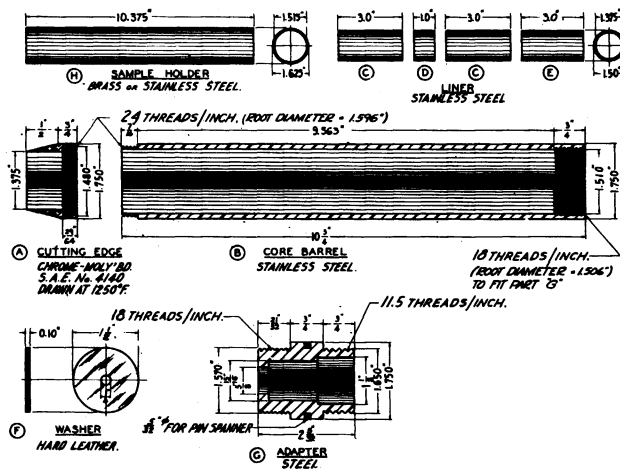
CORE BARREL ASSEMBLY FOR UNDISTURBED
